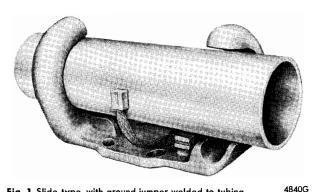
Slide-type, with ground jumper welded to tubing.
